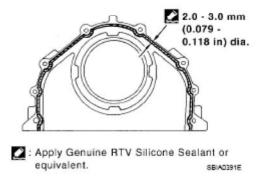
Applying Liquid Gasket Thoroughly To Rear Oil Seal Retainer Courtesy of NISSAN MOTOR CO., U.S.A.
